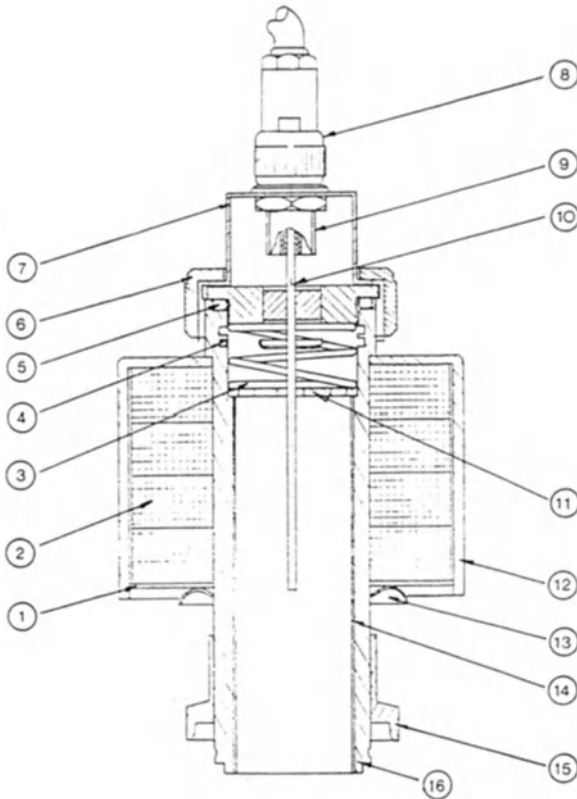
Cold cathode gauge type CP25.3 manufactured by Edwards High Vacuum International. (1) Magnet plate (thin); (2) magnets 4; (3) spring; (4) radioactive insert; (5) 'O' ring; (6) plastic nut; (7) cathode plate; (8) lead assembly; (9) connector type; (10) anode assembly; (11) cathode plate; (12) moulded cover; (13) starlock washer; (14) insert S/S sleeve; (15) muff coupling; (16) body tube.
